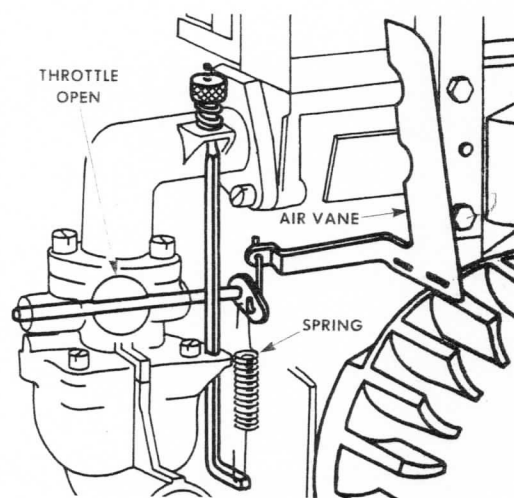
The governor spring tries to hold the throttle open. (Briggs & Stratton Corp.)
